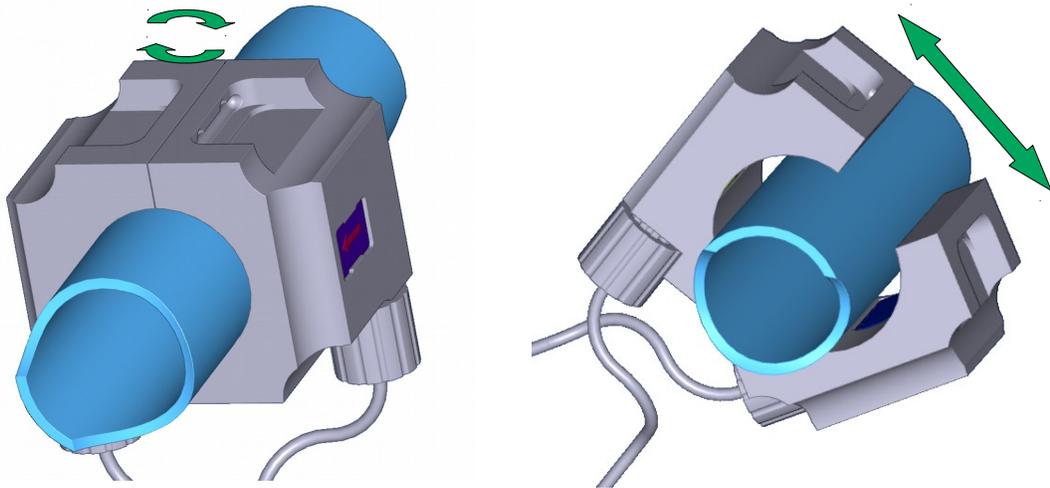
Remove frame by gently breaking vacuum then pulling sensor faces away from tube.
